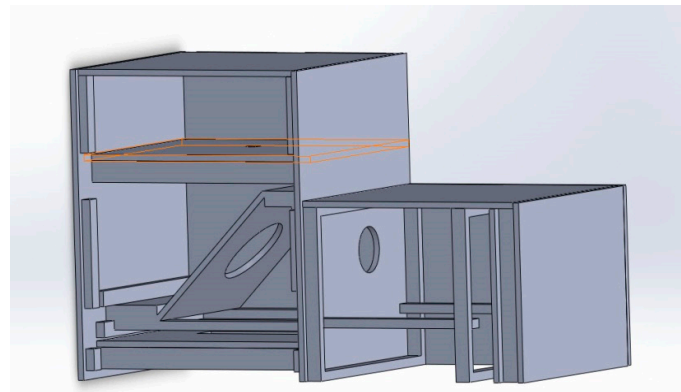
Prototype design of a box fabricated on a 3D printer, with a lens holder at an angle of 45°.
